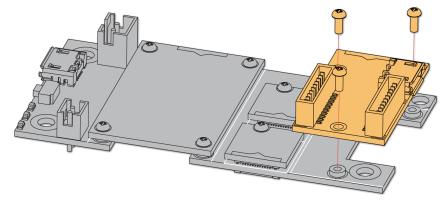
RAK5804 mounting mechanism on a WisBlock Base module
